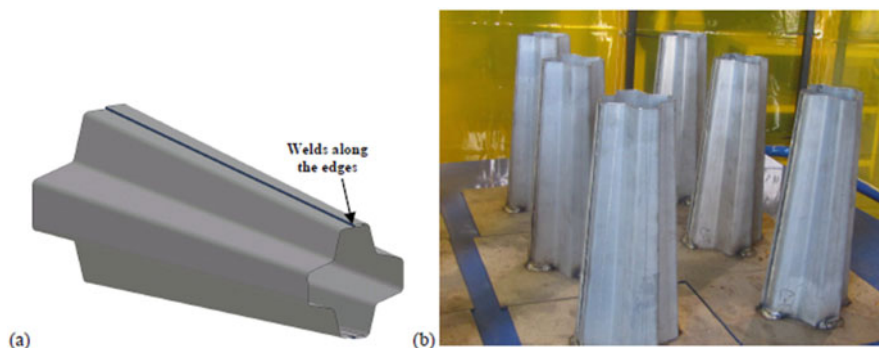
(a) Schematic of a 12-sided component for drop-weight testing, and (b) welded components prior to testing [41]
